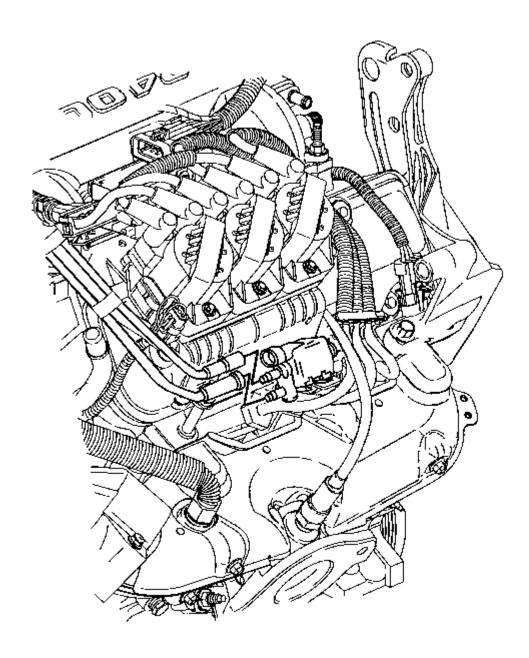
Valve Rocker Arm Cover - Right Courtesy of GENERAL MOTORS CORP.
